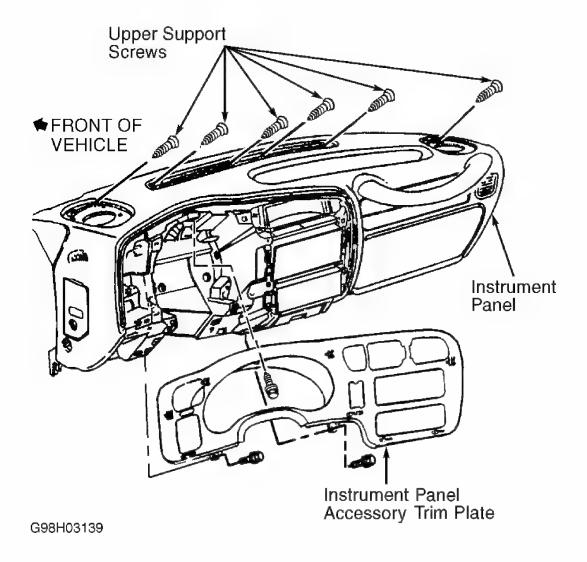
Exploded View Of Instrument Panel & Accessory Trim Plate Courtesy of GENERAL MOTORS CORP.
